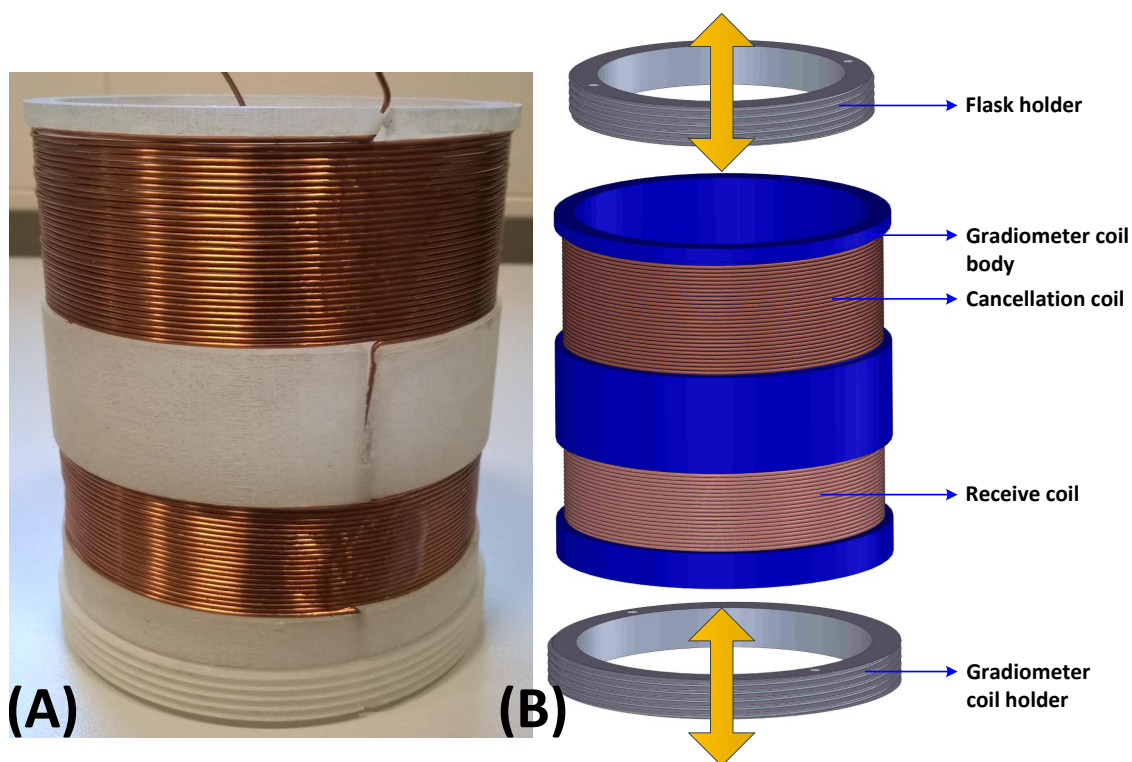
The front view of the manufactured gradiometer coil shown in (A) is printed with a 3-D printer. The assembly drawing of the gradiometer coil with the flask holder and gradiometer coil holder shown in (B). The gradiometer coil holder is vertically movable inside the transmit coil via the treads shown in Figure 5.7 to attain maximum attenuation of the excitation signal. The flask holder is also vertically movable inside the gradiometer coil to attain maximum amplitude response from the SPIONs under test.
